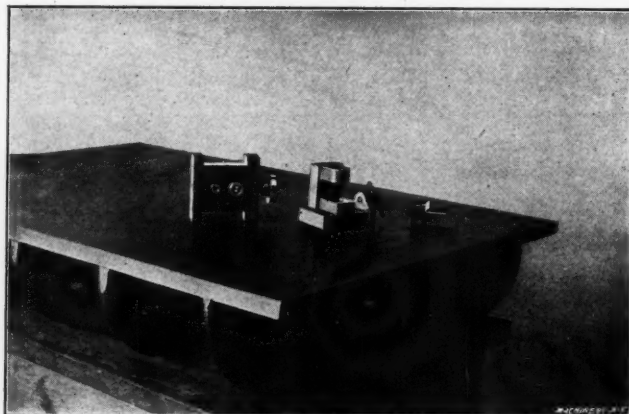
Finished Locking Bolt Block, and Jigs used in Drilling Holes in Block and Spindle Head
